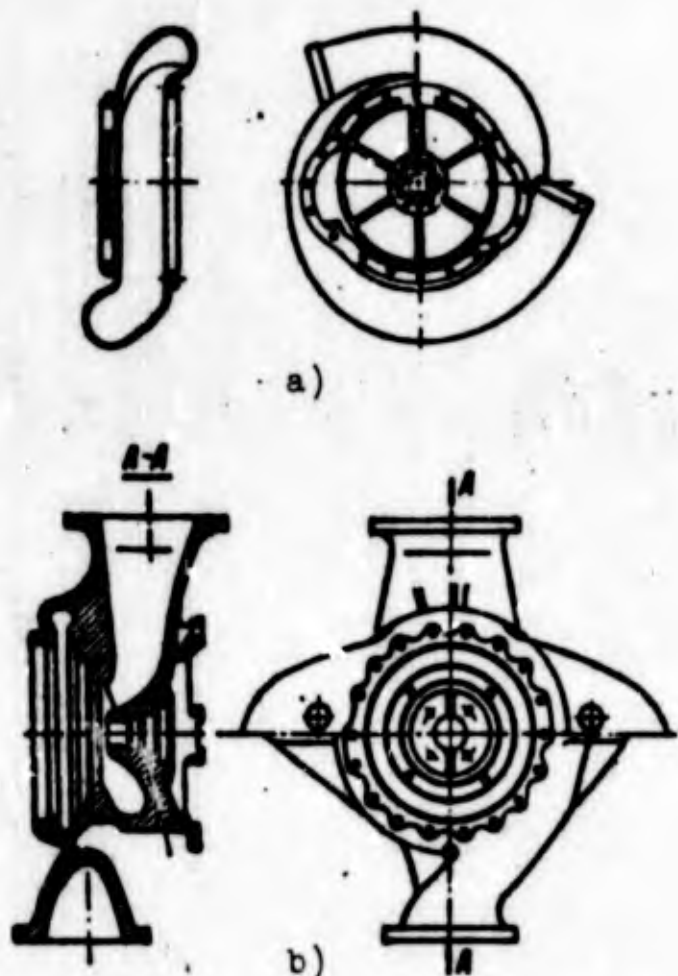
Housings of turbopump units. a) housing pump; b) turbine housing.
